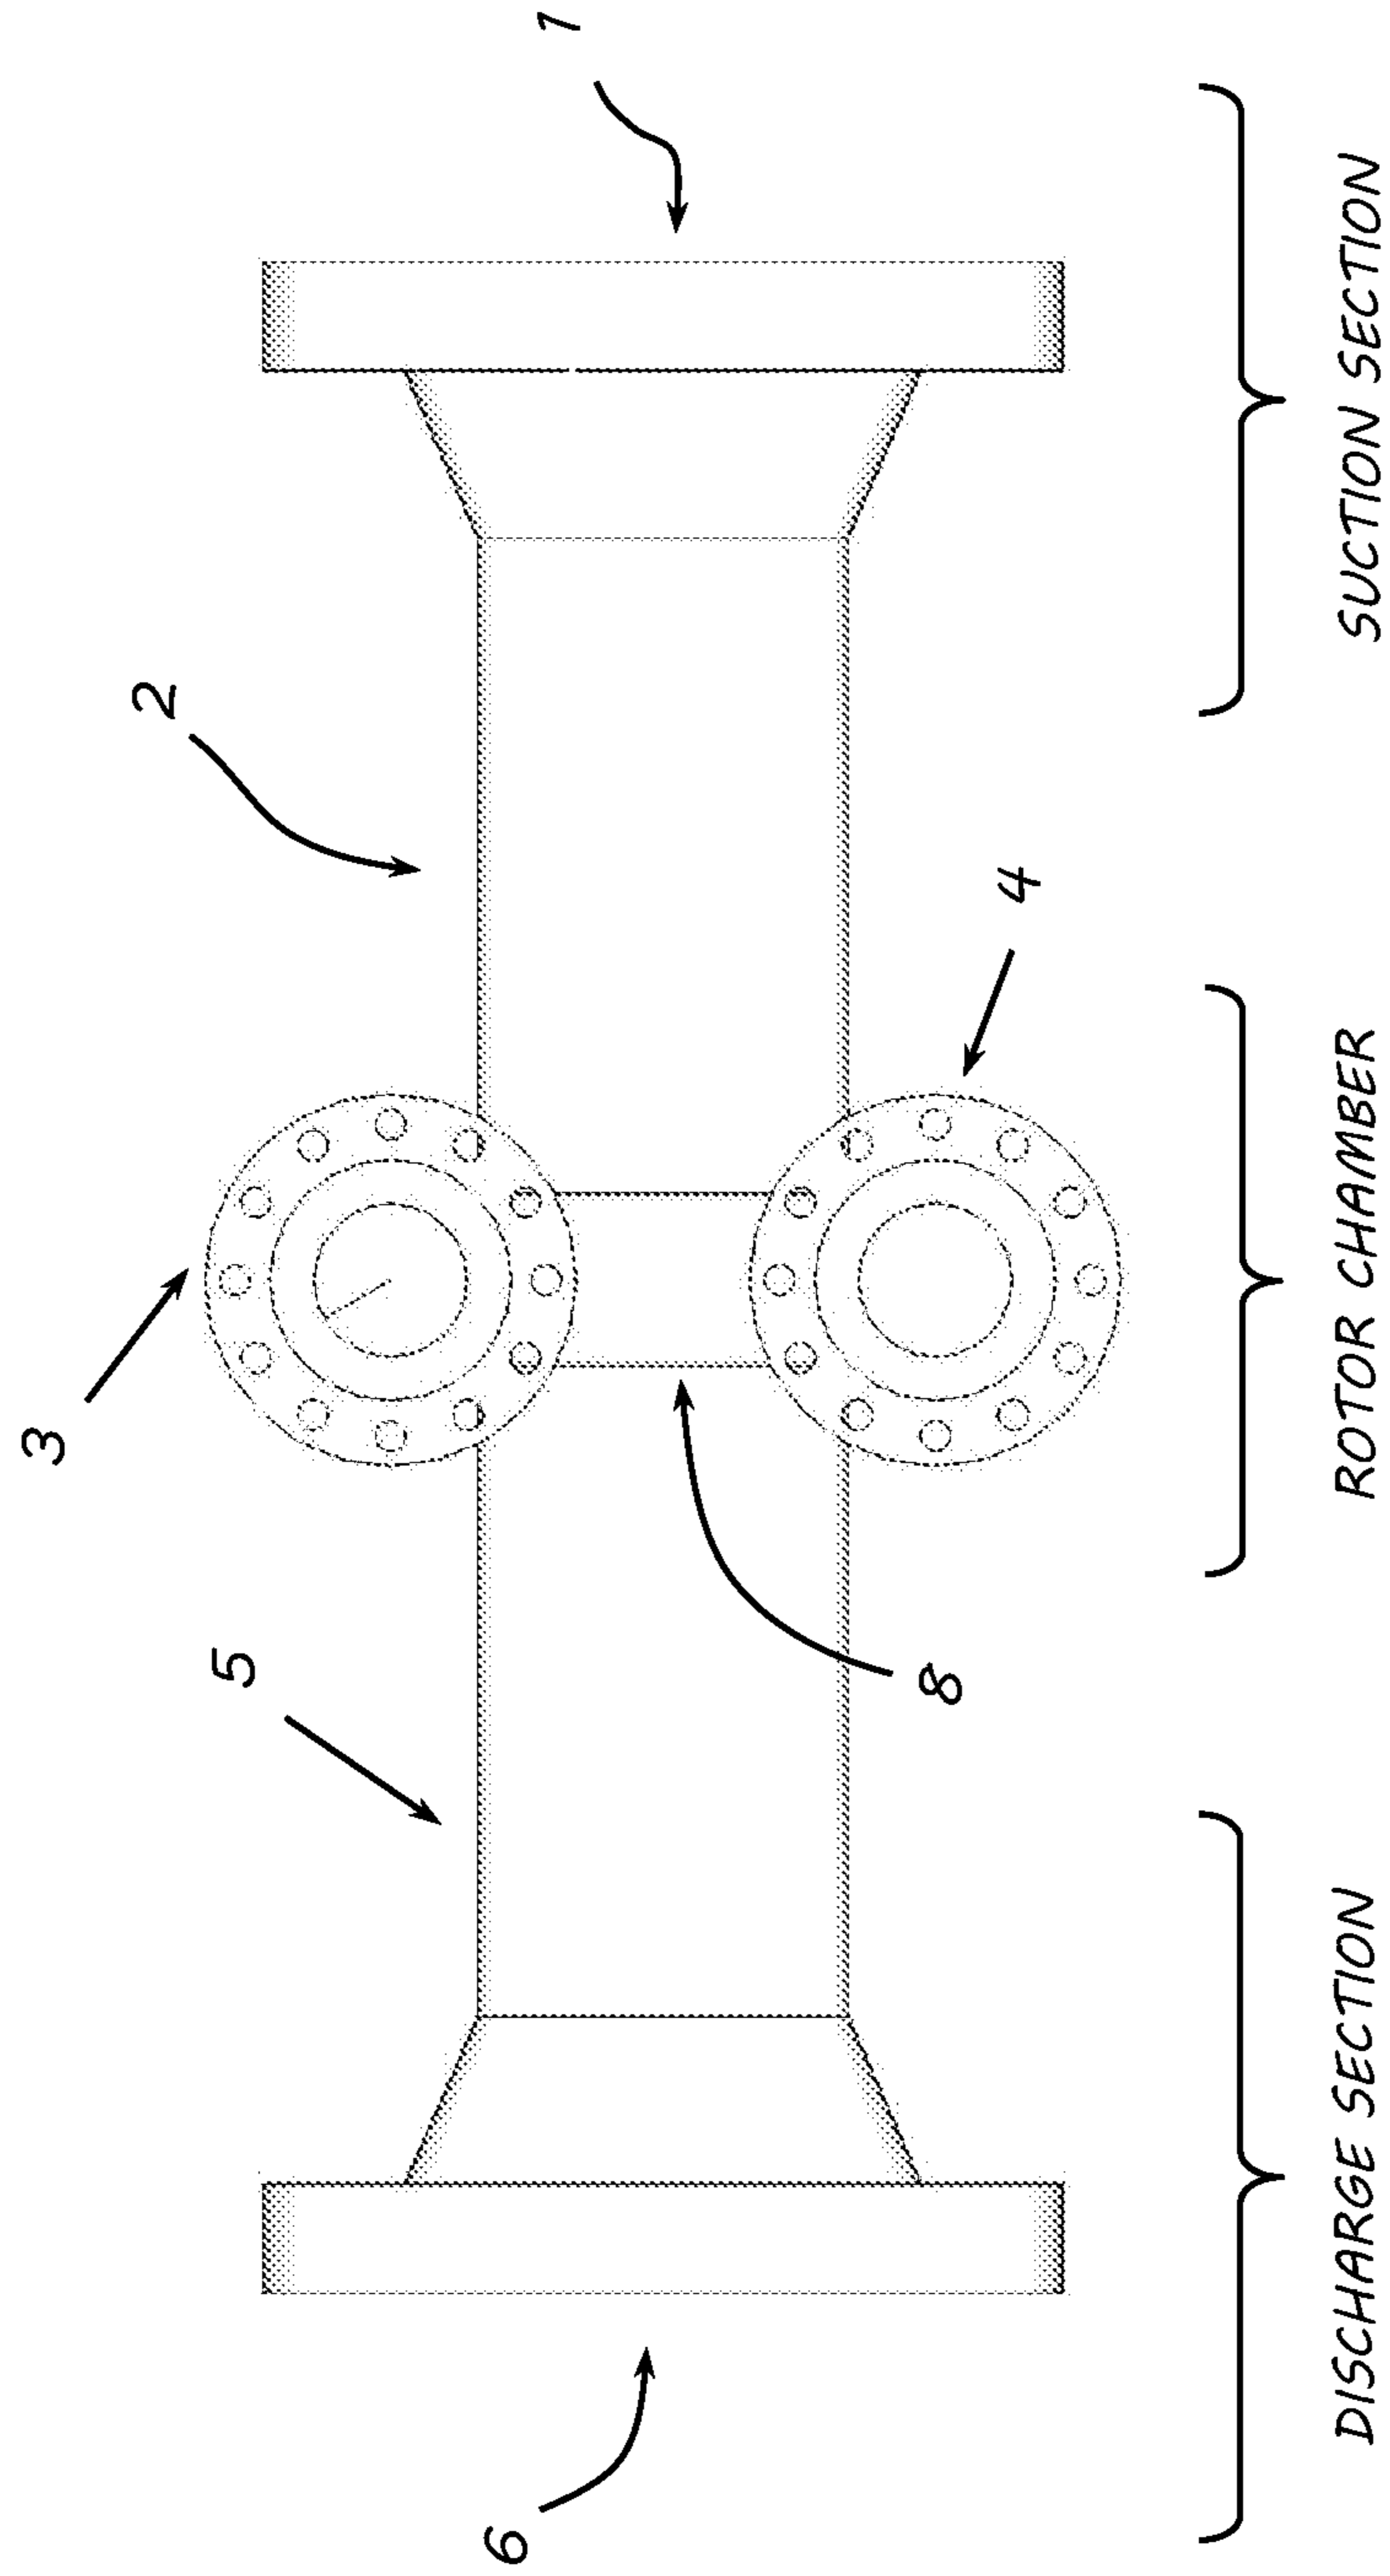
Side Horizontal View of the Artifact showing External Discharge of Motive Fluid Outside the Scroll Casing
